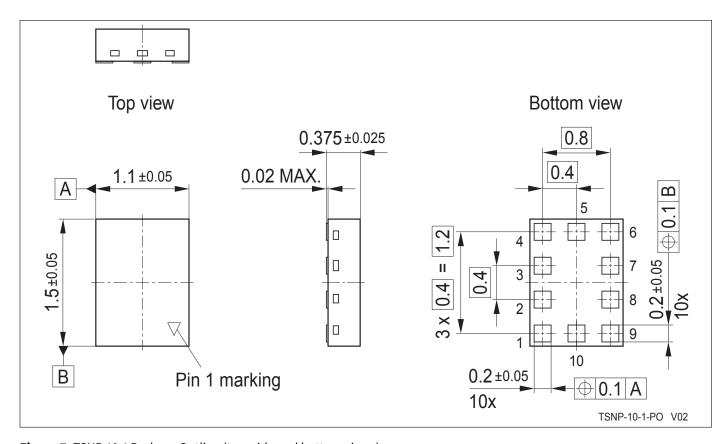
TSNP-10-1 Package Outline (top, side and bottom views)
